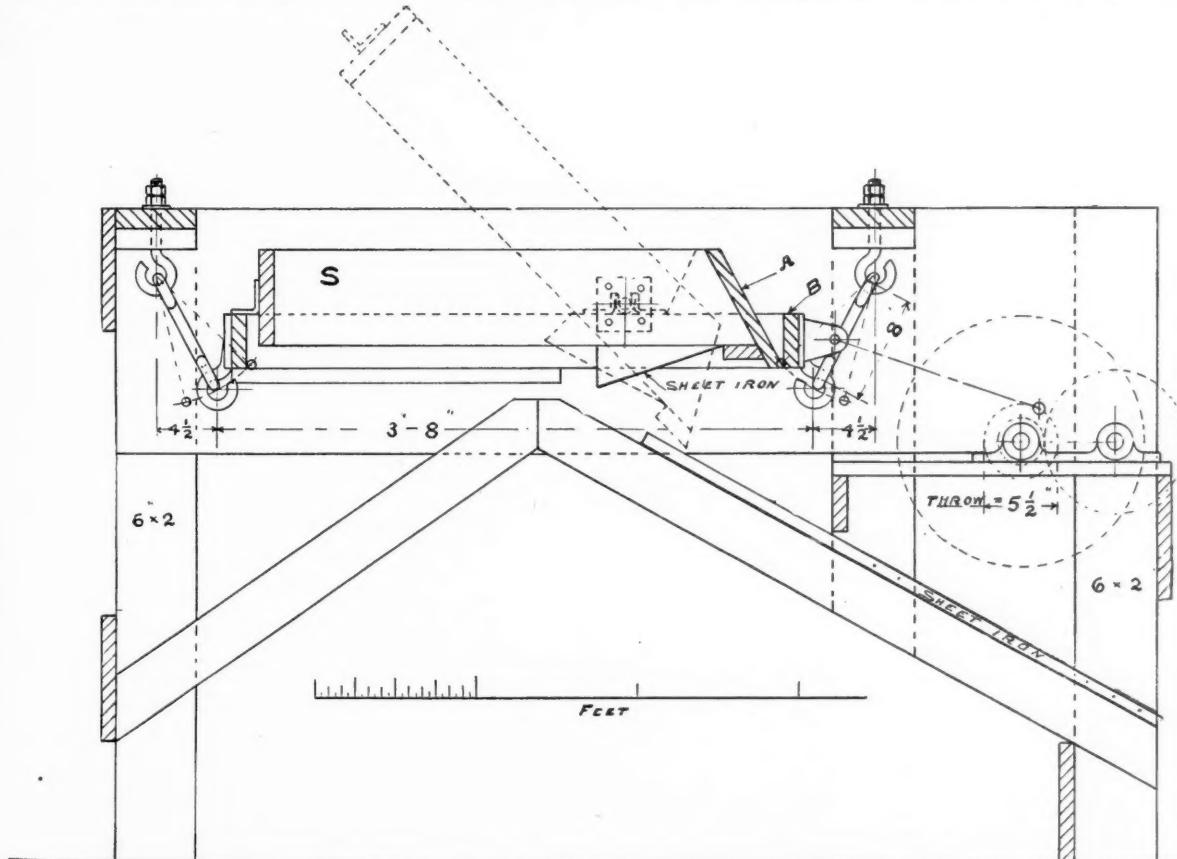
SAND-SIFTING MACHINE—SIDE ELEVATION.
